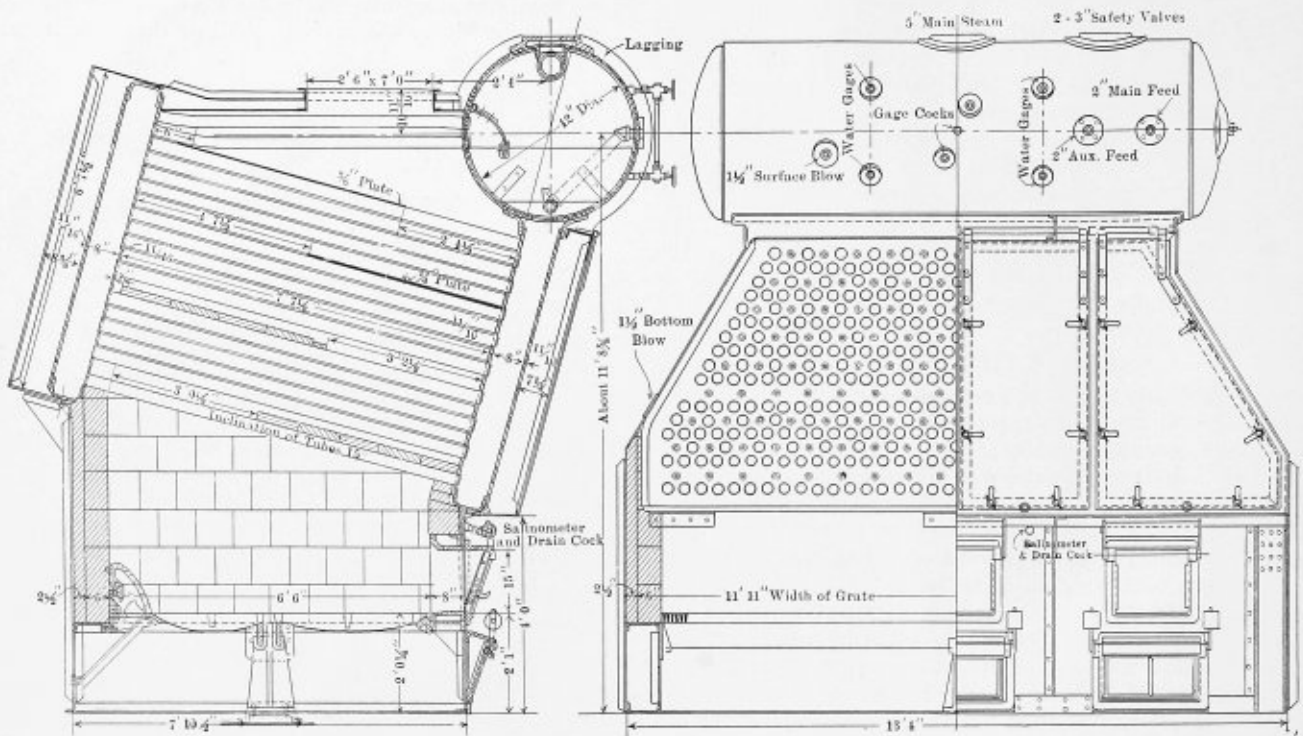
General Arrangement of Standard Watertube Boiler for Emergency Fleet Corporation Designed by Technical Department, Washington
